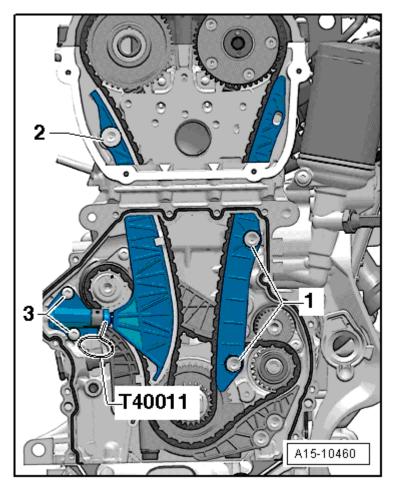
Identifying Camshaft Timing Chain Tensioner Bolts, Camshaft Timing Chain Guide Rail And Guide Pins
